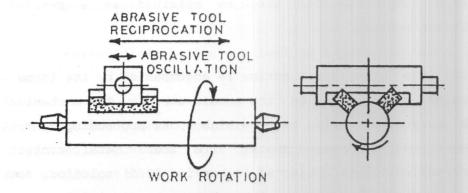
Superfinishing external cylinderical surfaces for rotating workpieces.
